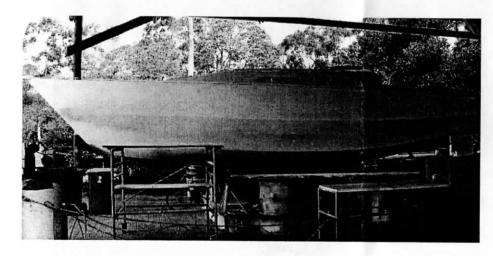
Van De Stadt 34, steel multi-chined sailing yacht
